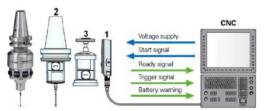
Wireless signal transmission 3D touch probes for machine tools: 1transmitter/receiver unit, 2-workpiece touch probe, 3-tool touch probe. *From Heidenhain
